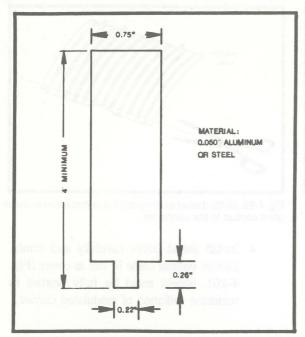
Construction of LED replacement tool. This tool is needed to push the LED into its holder.
